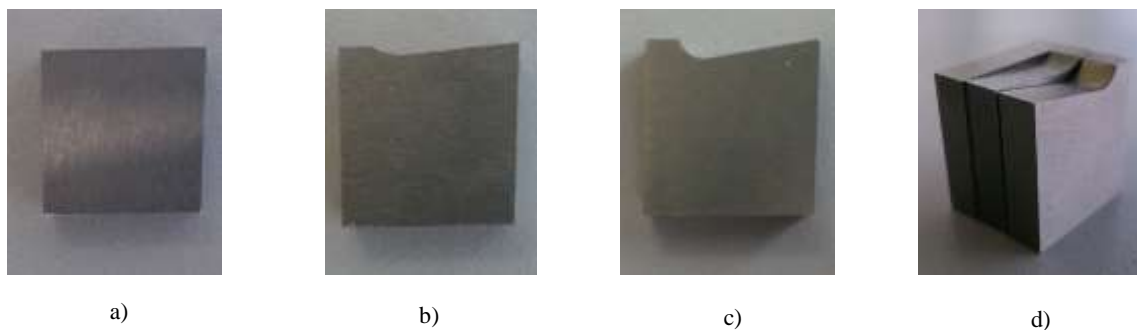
Cutting Inserts: a) Type I b) Type II c) Type III d) Cutting Inserts Side by Side
